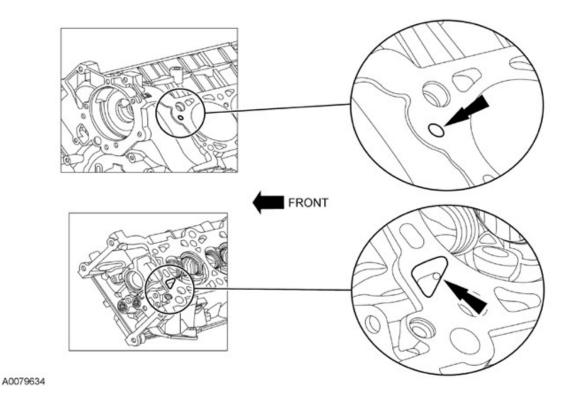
Identifying Oil Pressure Feed Area Courtesy of FORD MOTOR CO.
